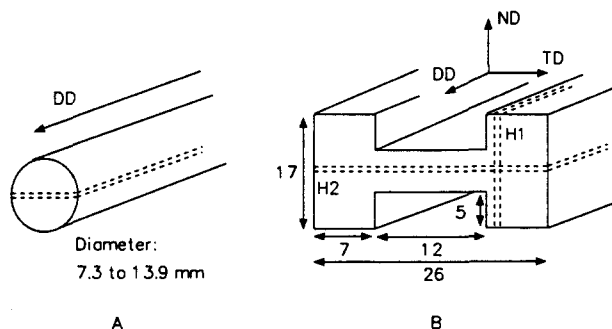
(A) Samples cut along the diameter of cylindrical rods; (B) H1 and H2 platelets cut from an H-shaped moulding (dimensions are given in mm)
